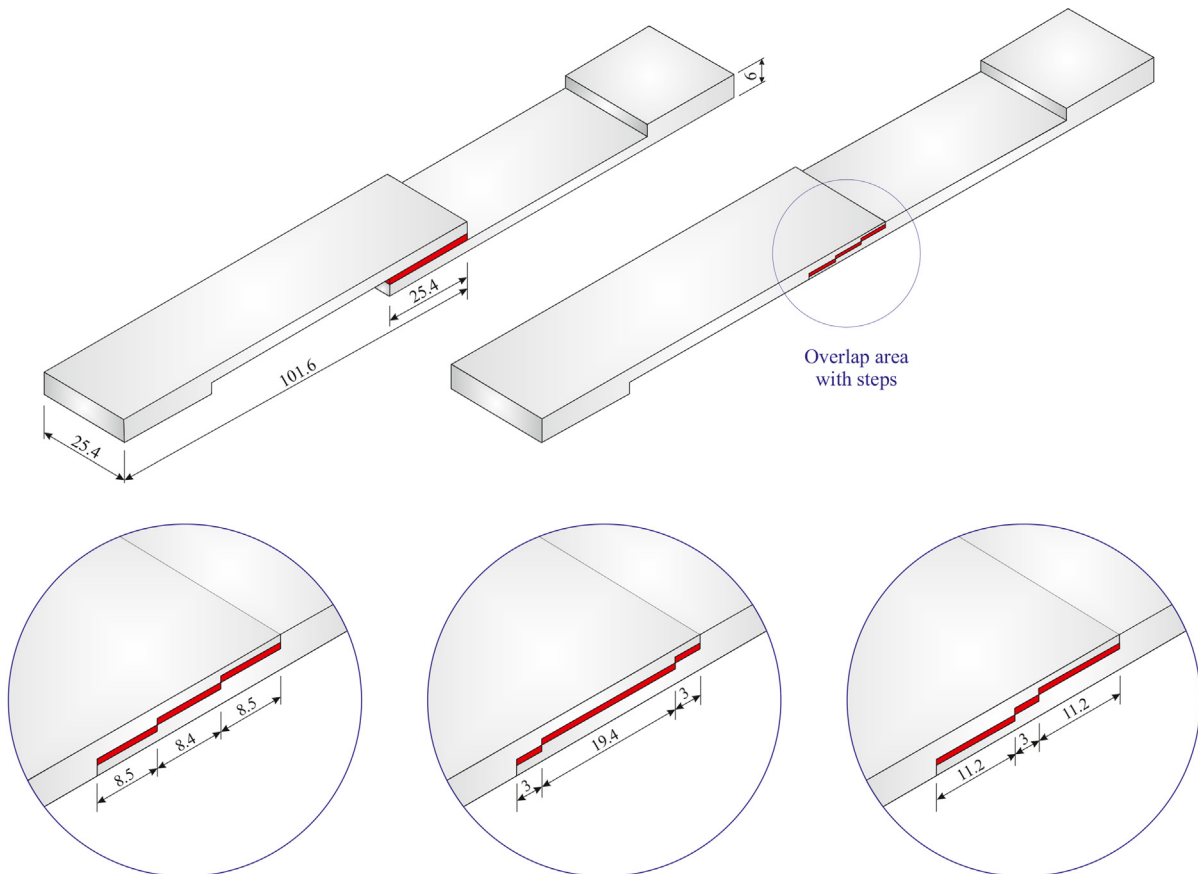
The conventional single-lap joint and geometry details in a modified joint with steps (dimensions in mm).
